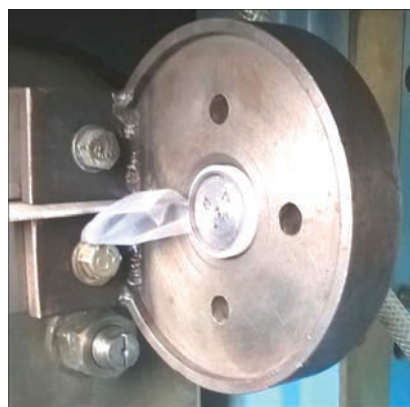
Installation H-126A for magnetic-pulse welding
